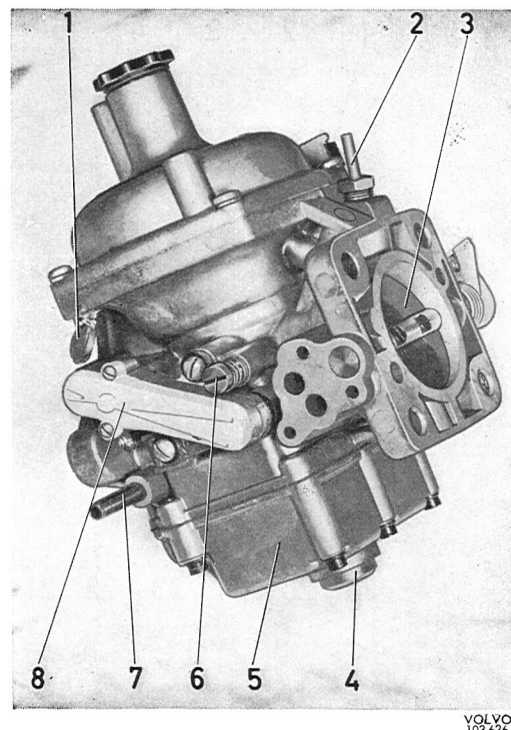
Stromberg carburetor, right side, B 20 A
